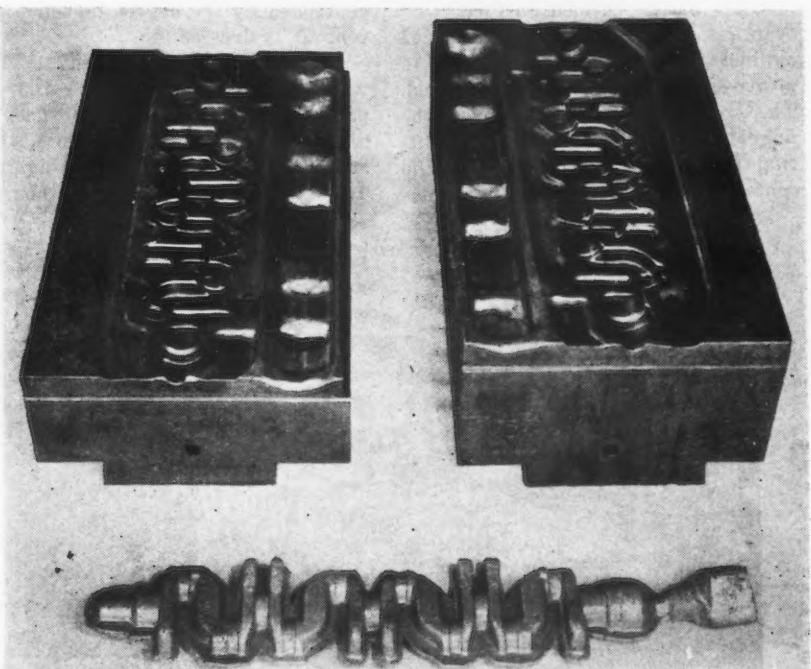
An eight-throw crankshaft forging and the dies used to press form it.
